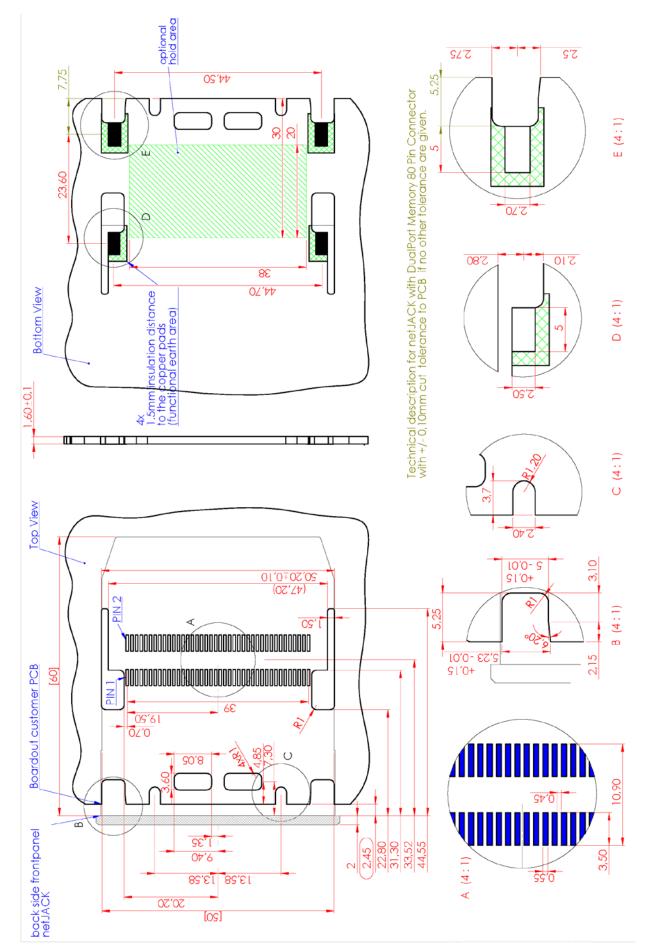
Dimension of carrier board for netJACK with dual-port memory 80-pin connector
